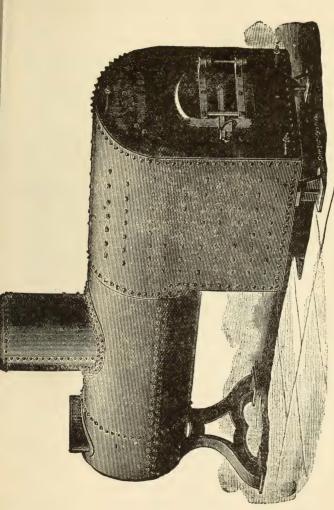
Portable or Locomotive Fire-Box Boiler, with Water Front and Open-Bottom Fire-Box,
